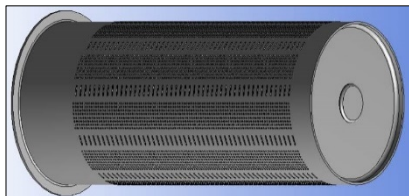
A 3D model of a cylindrical perforated gas burner showing a demanding outer
